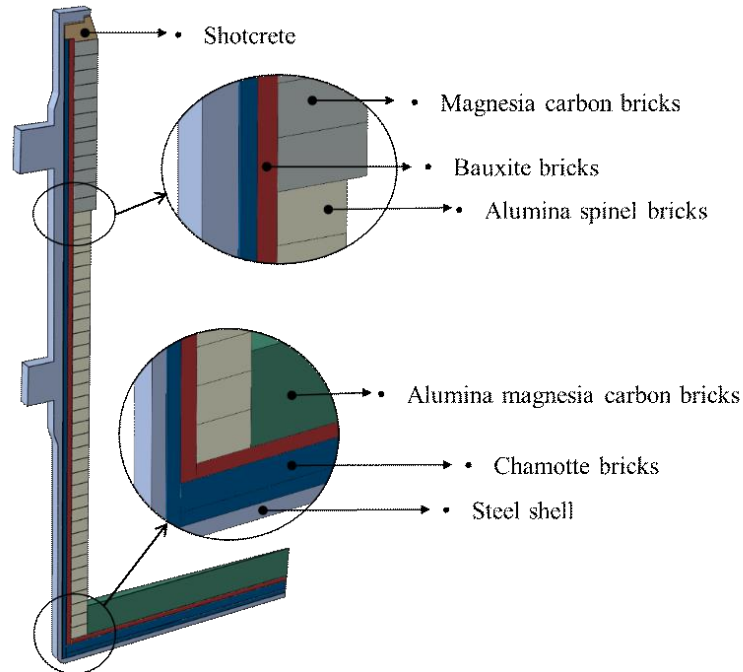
3D unit-cell model of the steel ladle refractory lining
